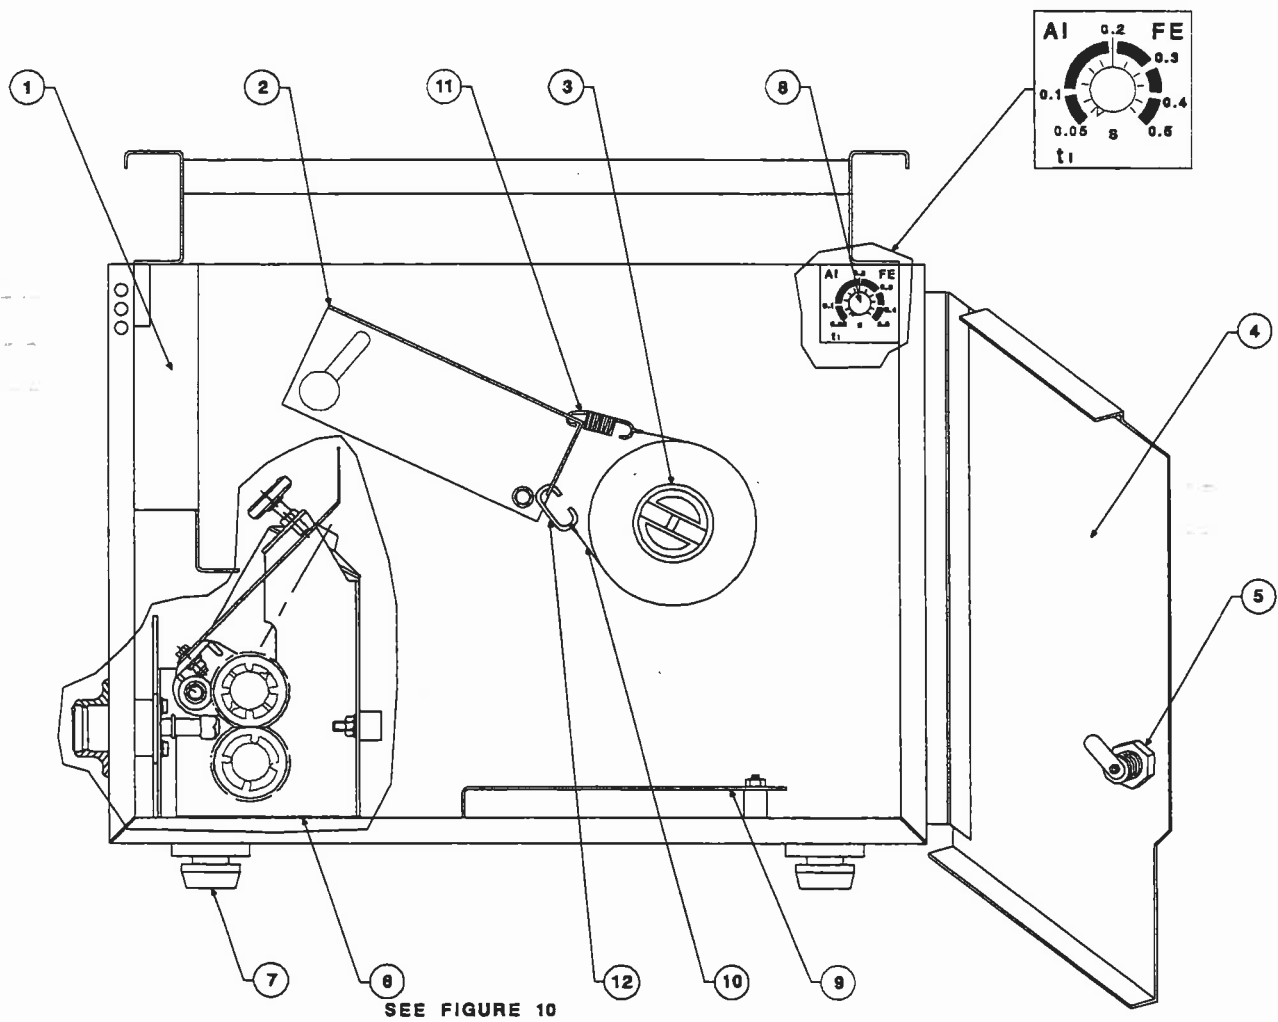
PD20 Right Side, Wire Spool Cabinet
